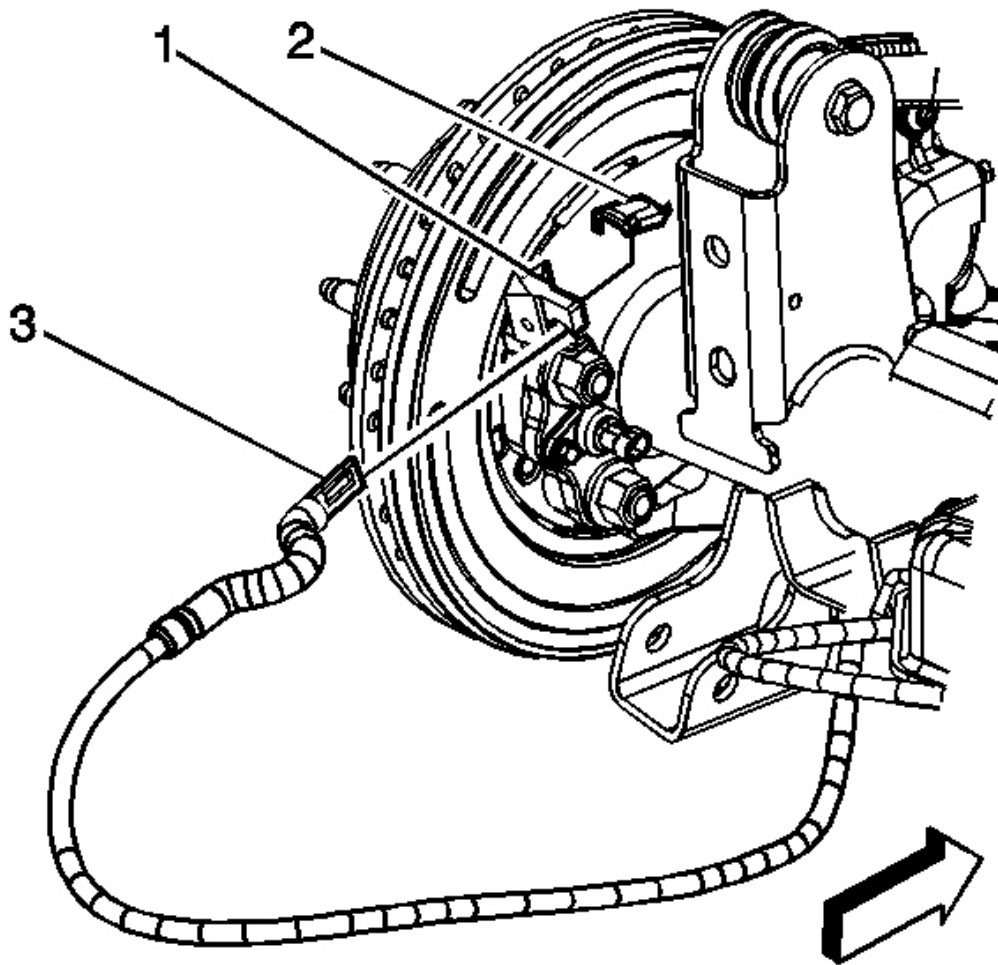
Left-Rear Park Brake Cable, Backing Plate, Park Brake Actuator & Cable Guide
